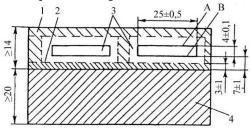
Arrangements for test assembly cutting for deposited metal testing for resistance to ICC: 1 - deposited metal of the base layer;
